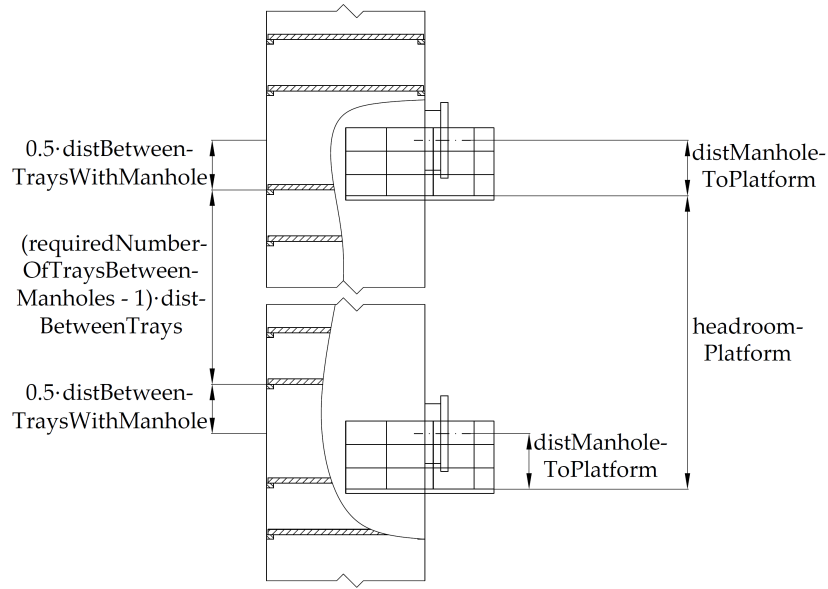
Accessibility to manholes in tray columns - positioning of platforms and manholes
